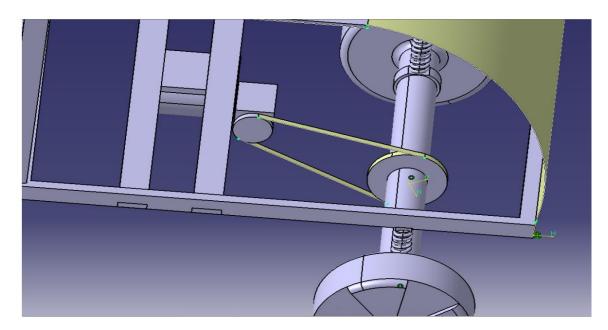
(d): special view shows the motor and gear reduction with in mesh state.
